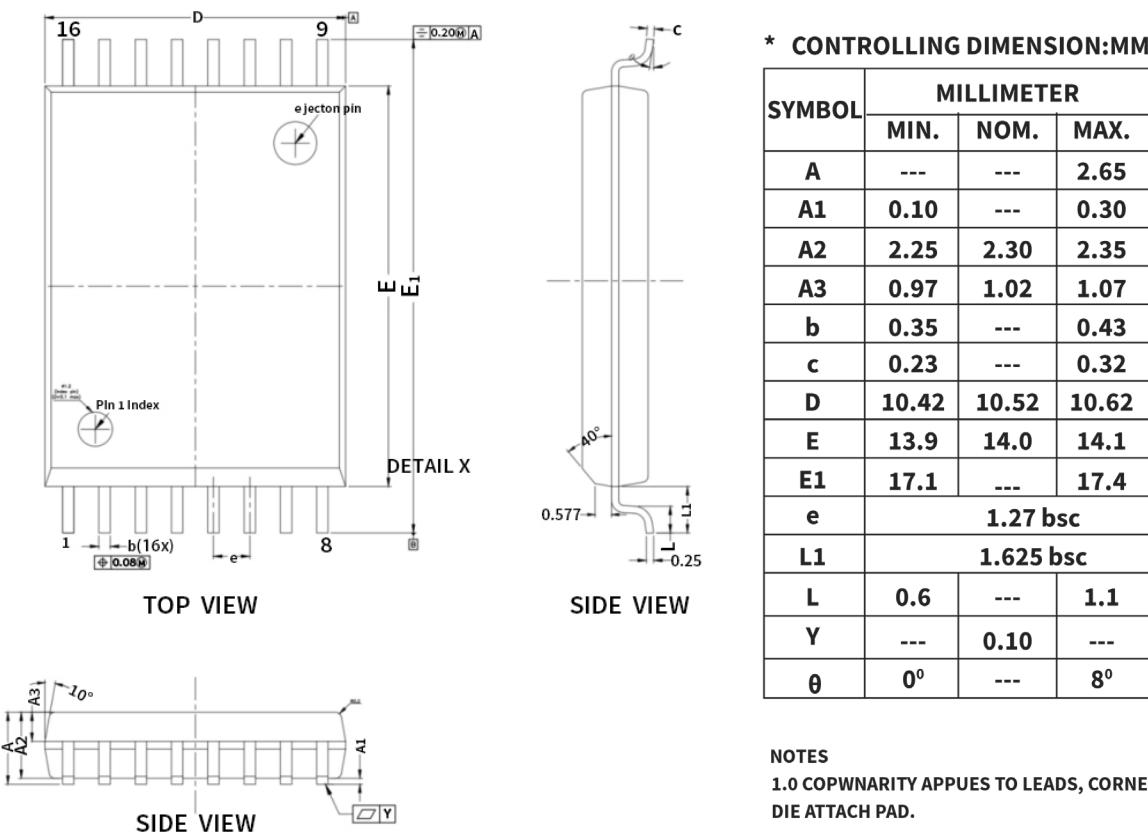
SOP16(600mil)/SOWW16 Package Shape and Dimension in millimeters
